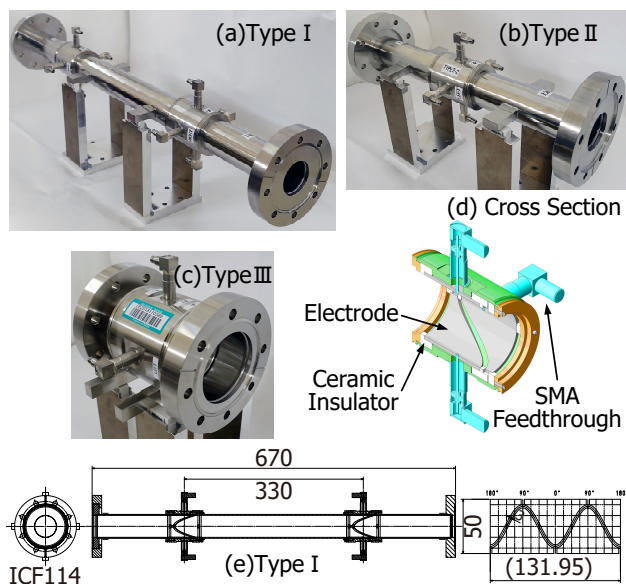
Photographs of the 3 types of BEPM: (a) Type I, (b) Type II, and (c) Type III. (d) Cross section drawing of a BEPM. (e) Schematic drawing of Type I [6].
